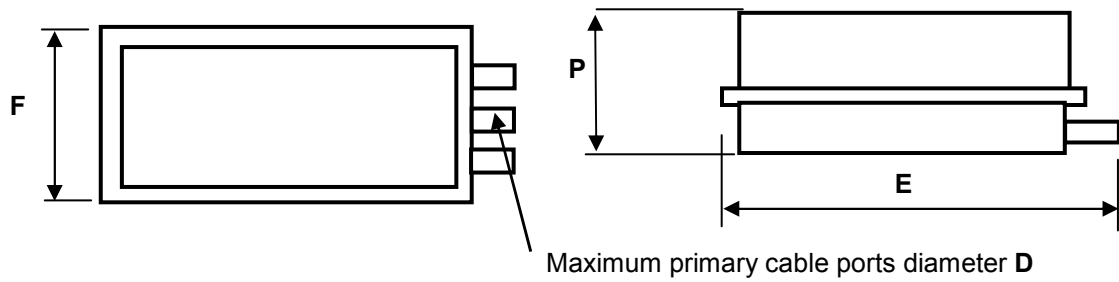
Diagram showing pan – Rectangular closures dimensions
